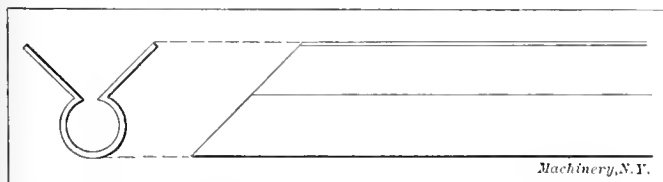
Corner Piece formed by the Die shown in Fig. 1
